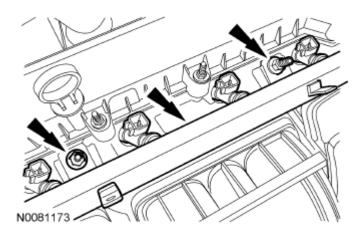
Locating Fuel Injector O-Rings Courtesy of FORD MOTOR CO.
